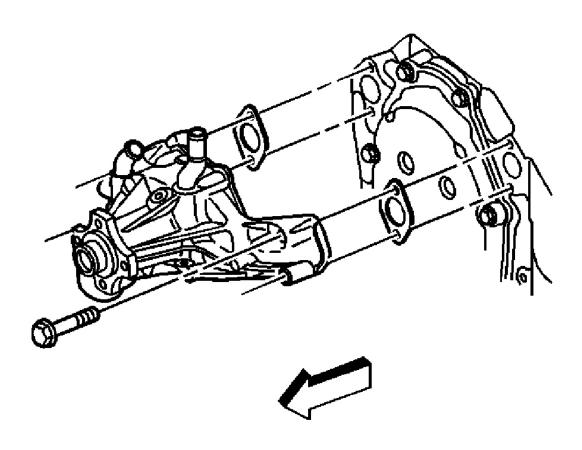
View Of Water Pump & Bolts Courtesy of GENERAL MOTORS CORP.
